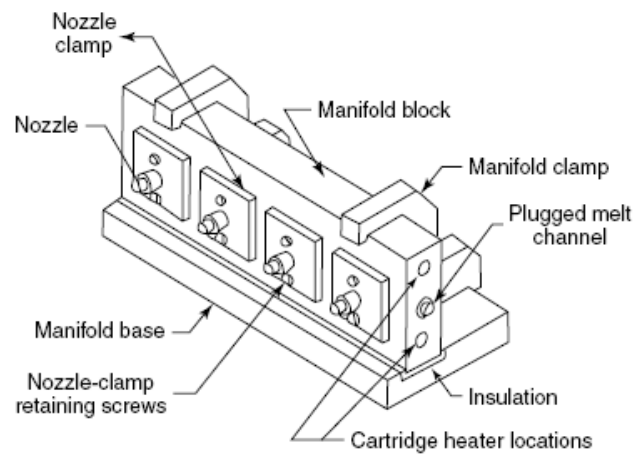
Injection manifold for injection molding of parisons. Individual nozzles are clamped to the manifold block, which houses a hot runner for the melt.
